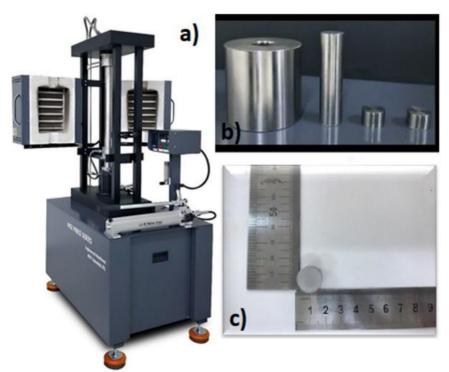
a. Hot pressing machine b. Die and punches made of hot work tool steel c. an example of produced samples
